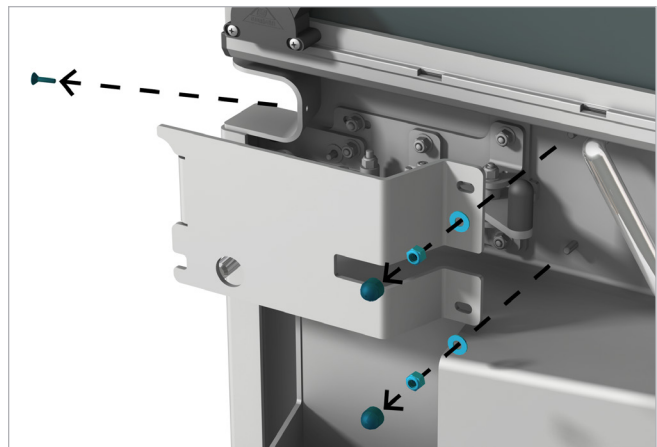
Nut cover, nut, washer, and flat head bolt locations.
